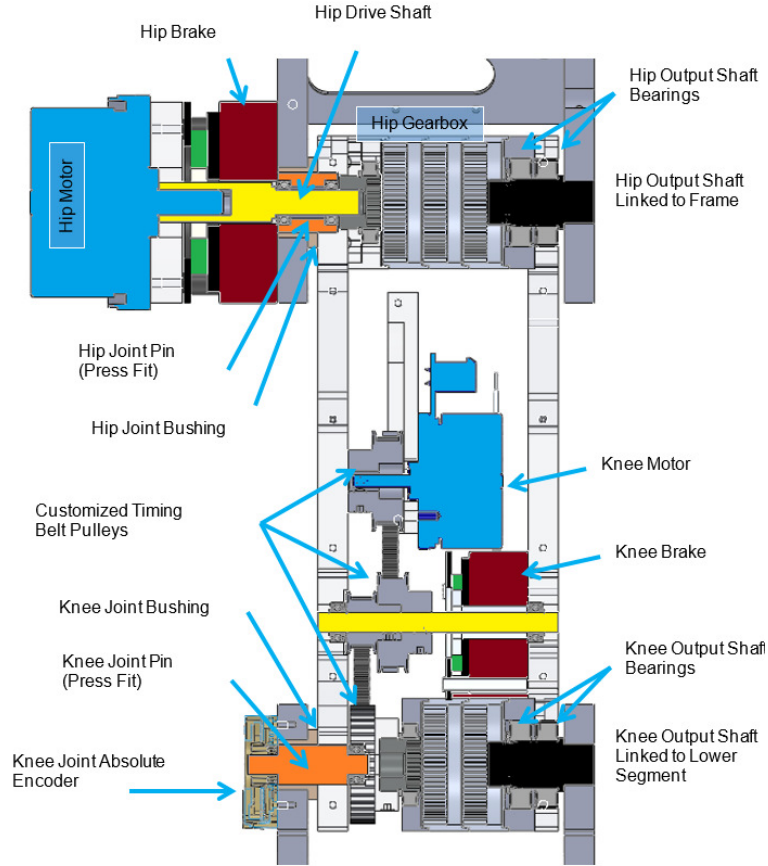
Cross section view of Rotor Buzz RLG leg assembly
